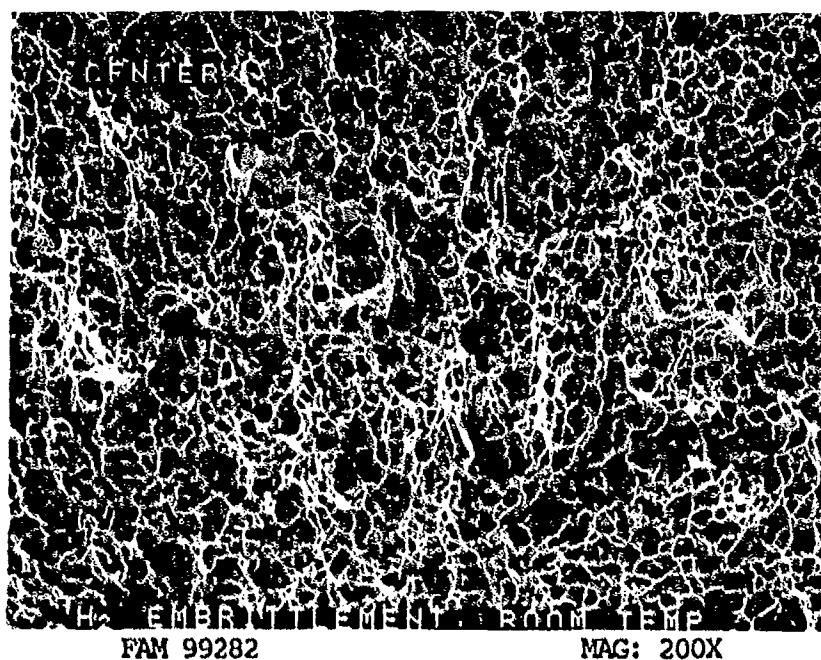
Equiaxed dimpled overstress near the center of the fracture surface.
